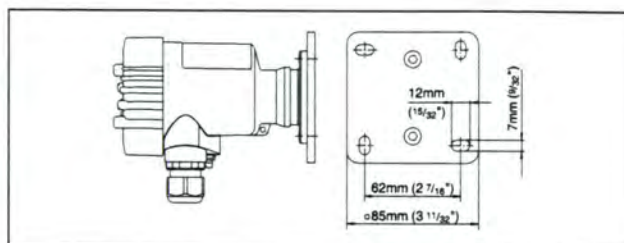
VEGADIS 61 for wall mounting, bottom view of mounting plate.
